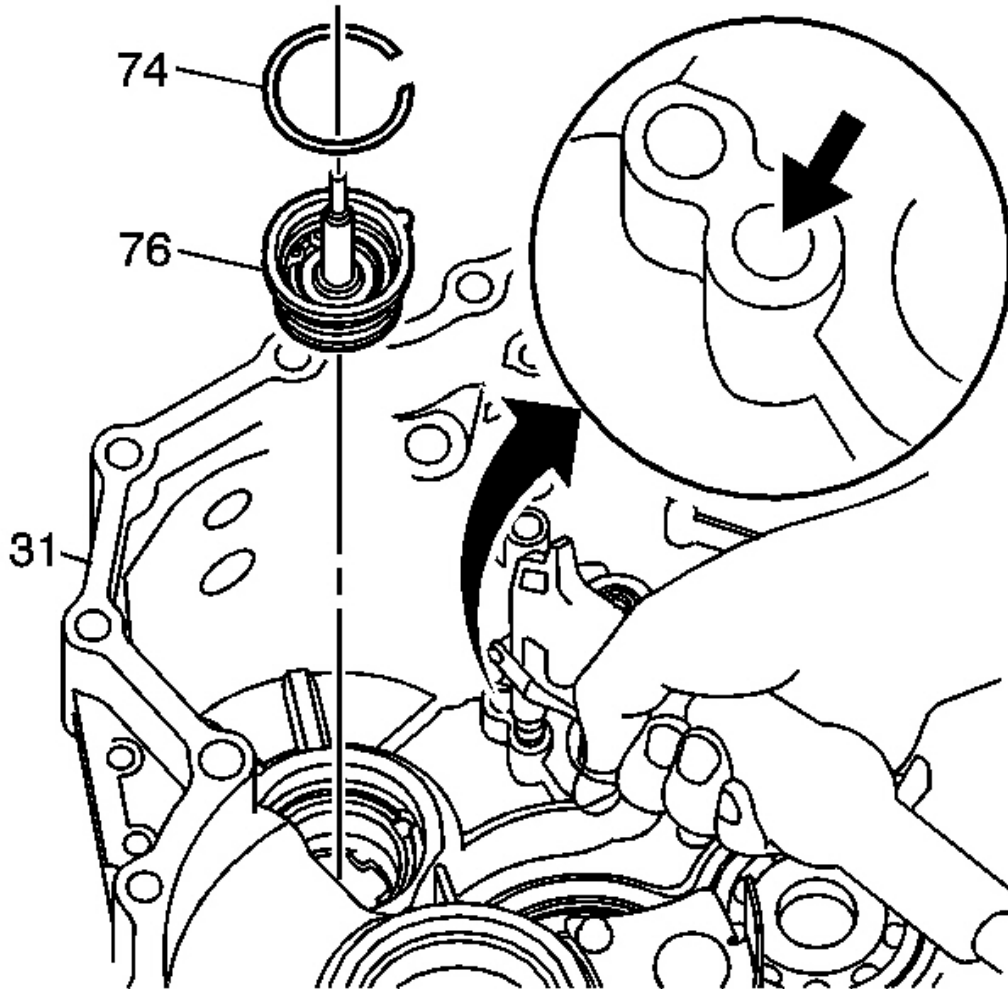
Applying Compressed Air Into 1st Clutch Fluid Feed Pipe
